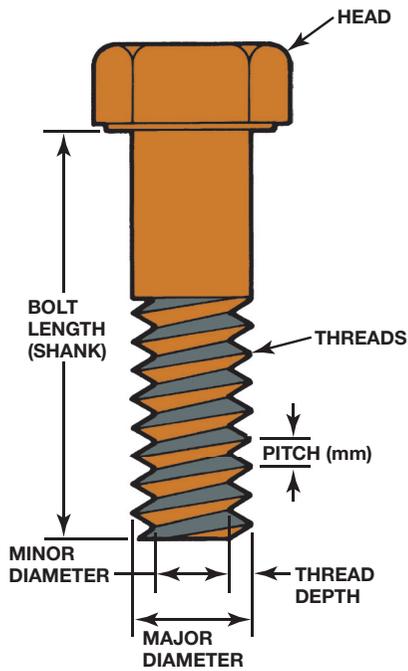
The dimensions of a typical bolt showing where sizes are measured.
